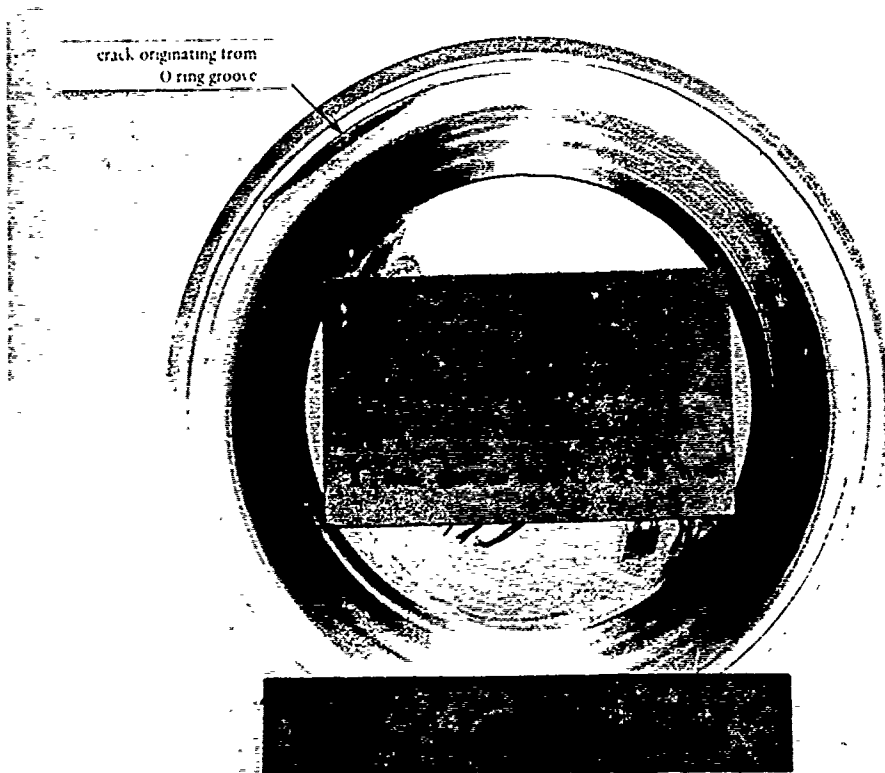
Typical cyclic fatigue cracks on the flange bearing surface; window I, Type I after 58 standard pressure cycles to 2,000 psi. Note that the crack originates at O-ring groove.
